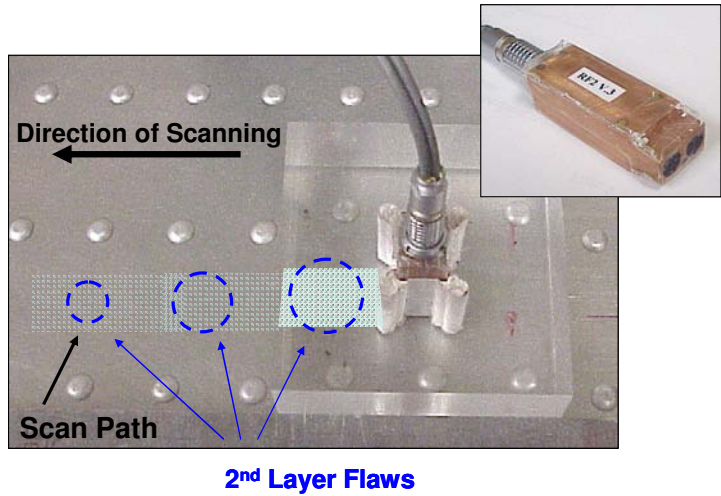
RFEC Probe Inspecting for Corrosion in a Riveted Aircraft Joint.
